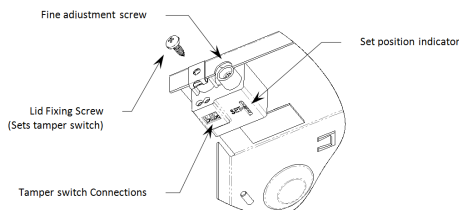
Position of tamper assembly in 'clam shell' style enclosure
